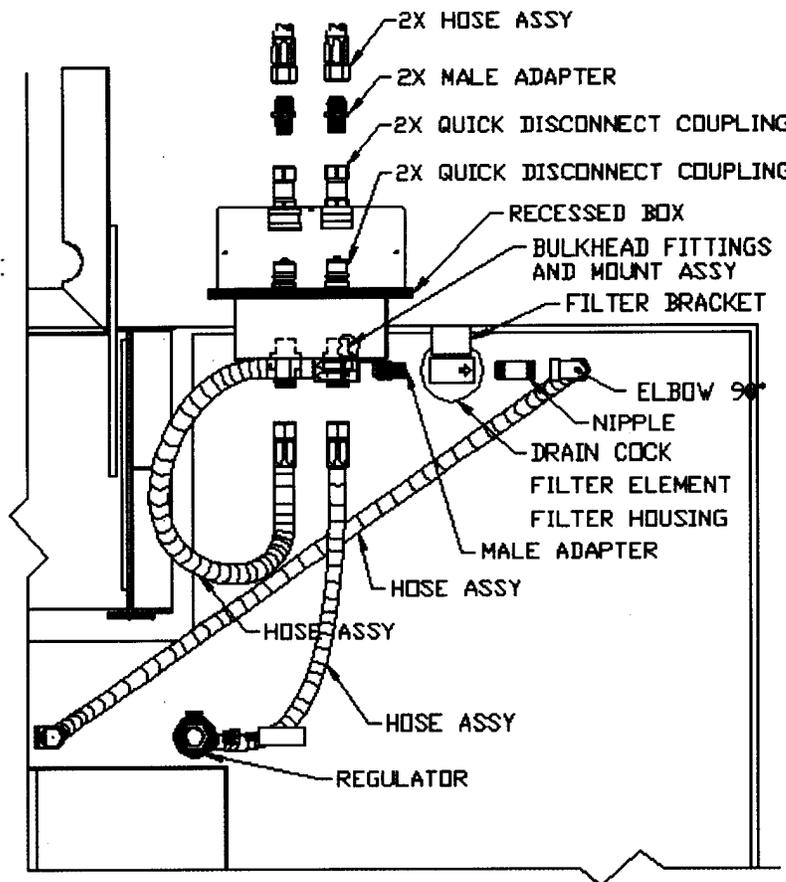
Quick Disconnect Coupling, Bulkhead Fittings and Mount Assembly. Water Filter Installation
